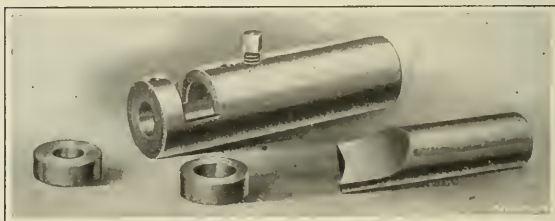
Facing Tool and Holder used in Standard Tool-holder
